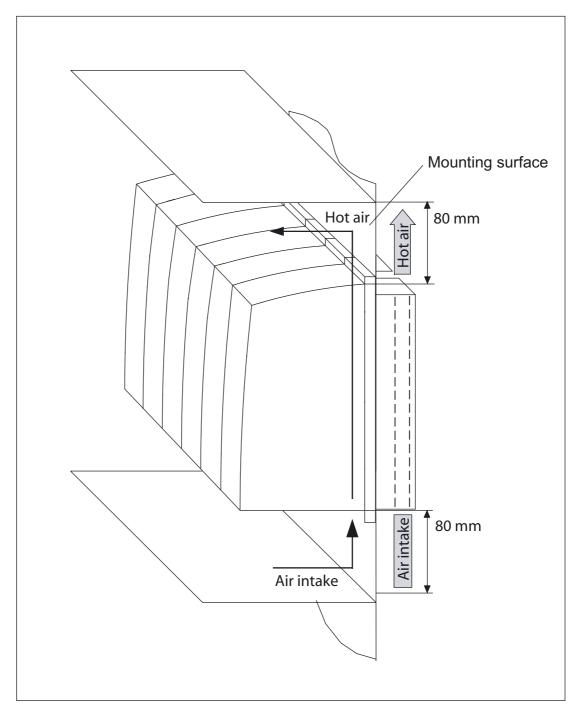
Clearances for booksize drive line-up with external air cooling
